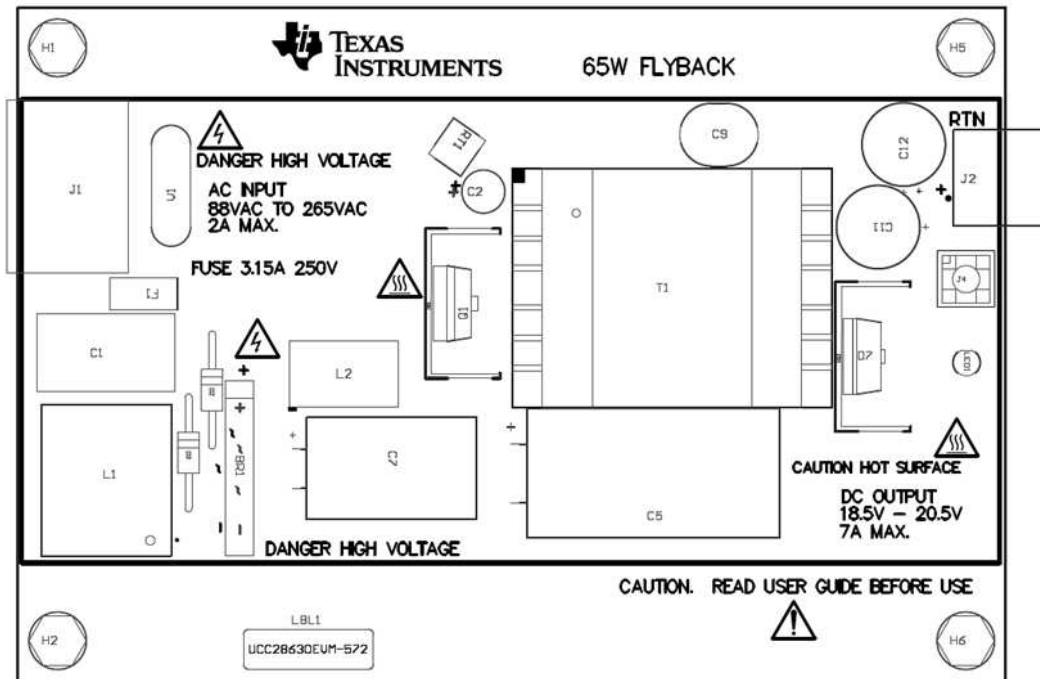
UCC28630EVM-572 Top Layer Assembly Drawing (top view)
